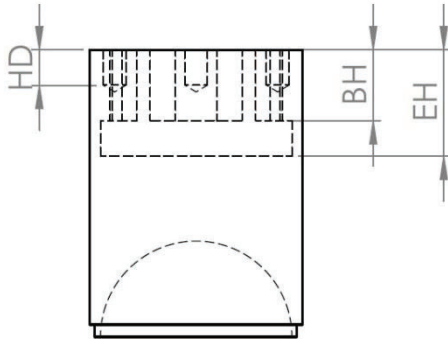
The extension, indicated by EH (Extended Height), incorporated as mounting points for attachment fixtures, removable after completion of the winding process.
